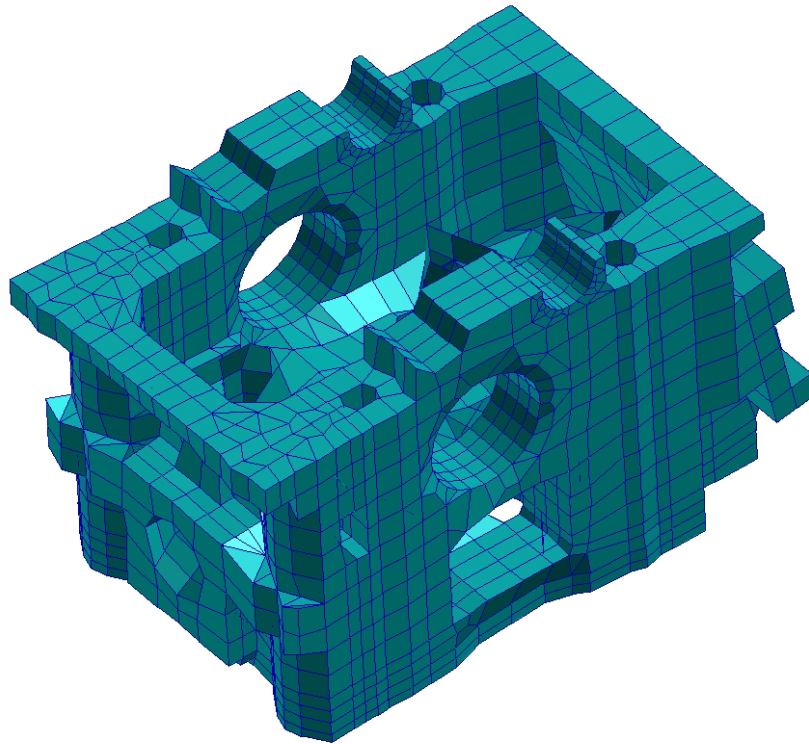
B. Modified One-Cylinder Head Casting Section
